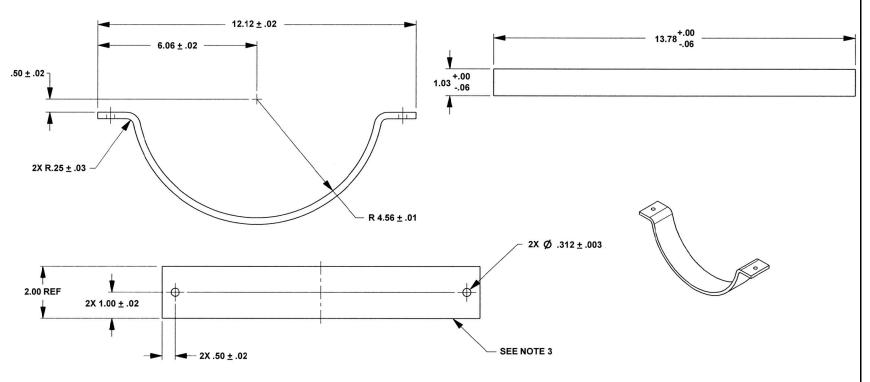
Single Cylinder Bracket Assembly, Part No. 17A631015. (Sheet 1 of 2)
